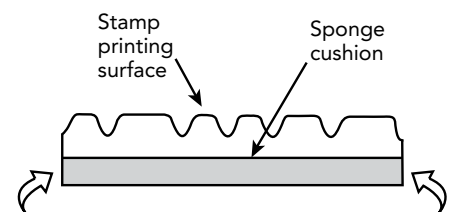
Side view of correctly trimmed die. Entire stamp printing surface is supported.
